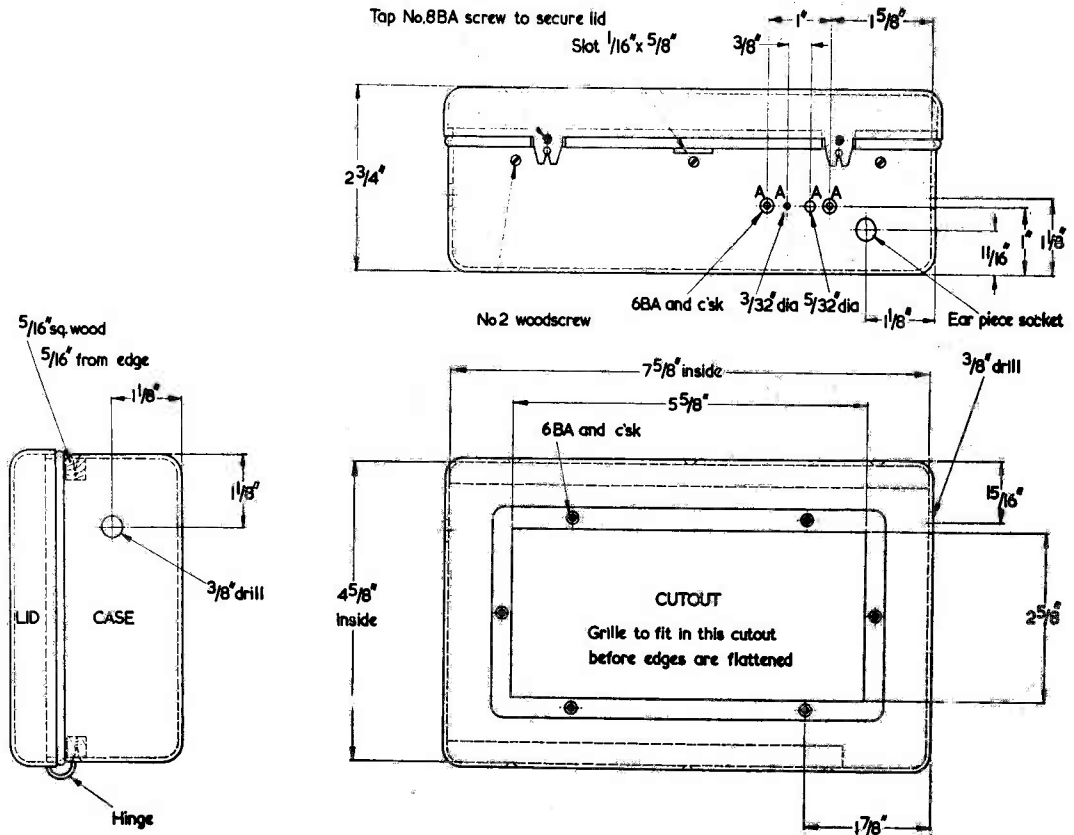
Drilling and cutting the polythene case. The holes marked "A" should only be drilled if an external supply socket is to be fitted. This point is discussed in the text
